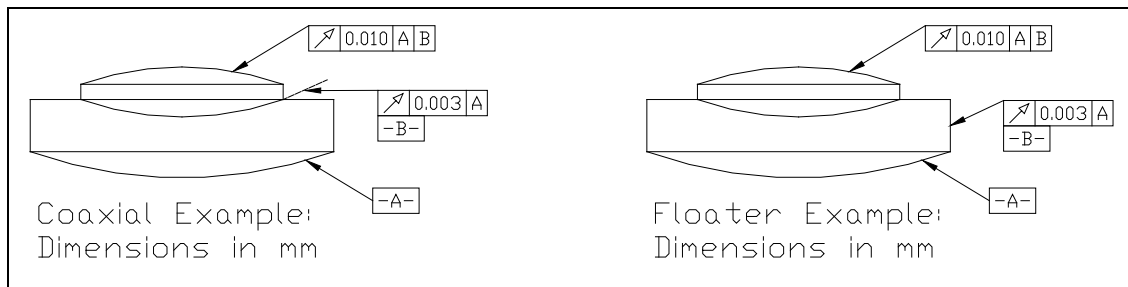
Samples of how to declare datums for air bearing assembly
